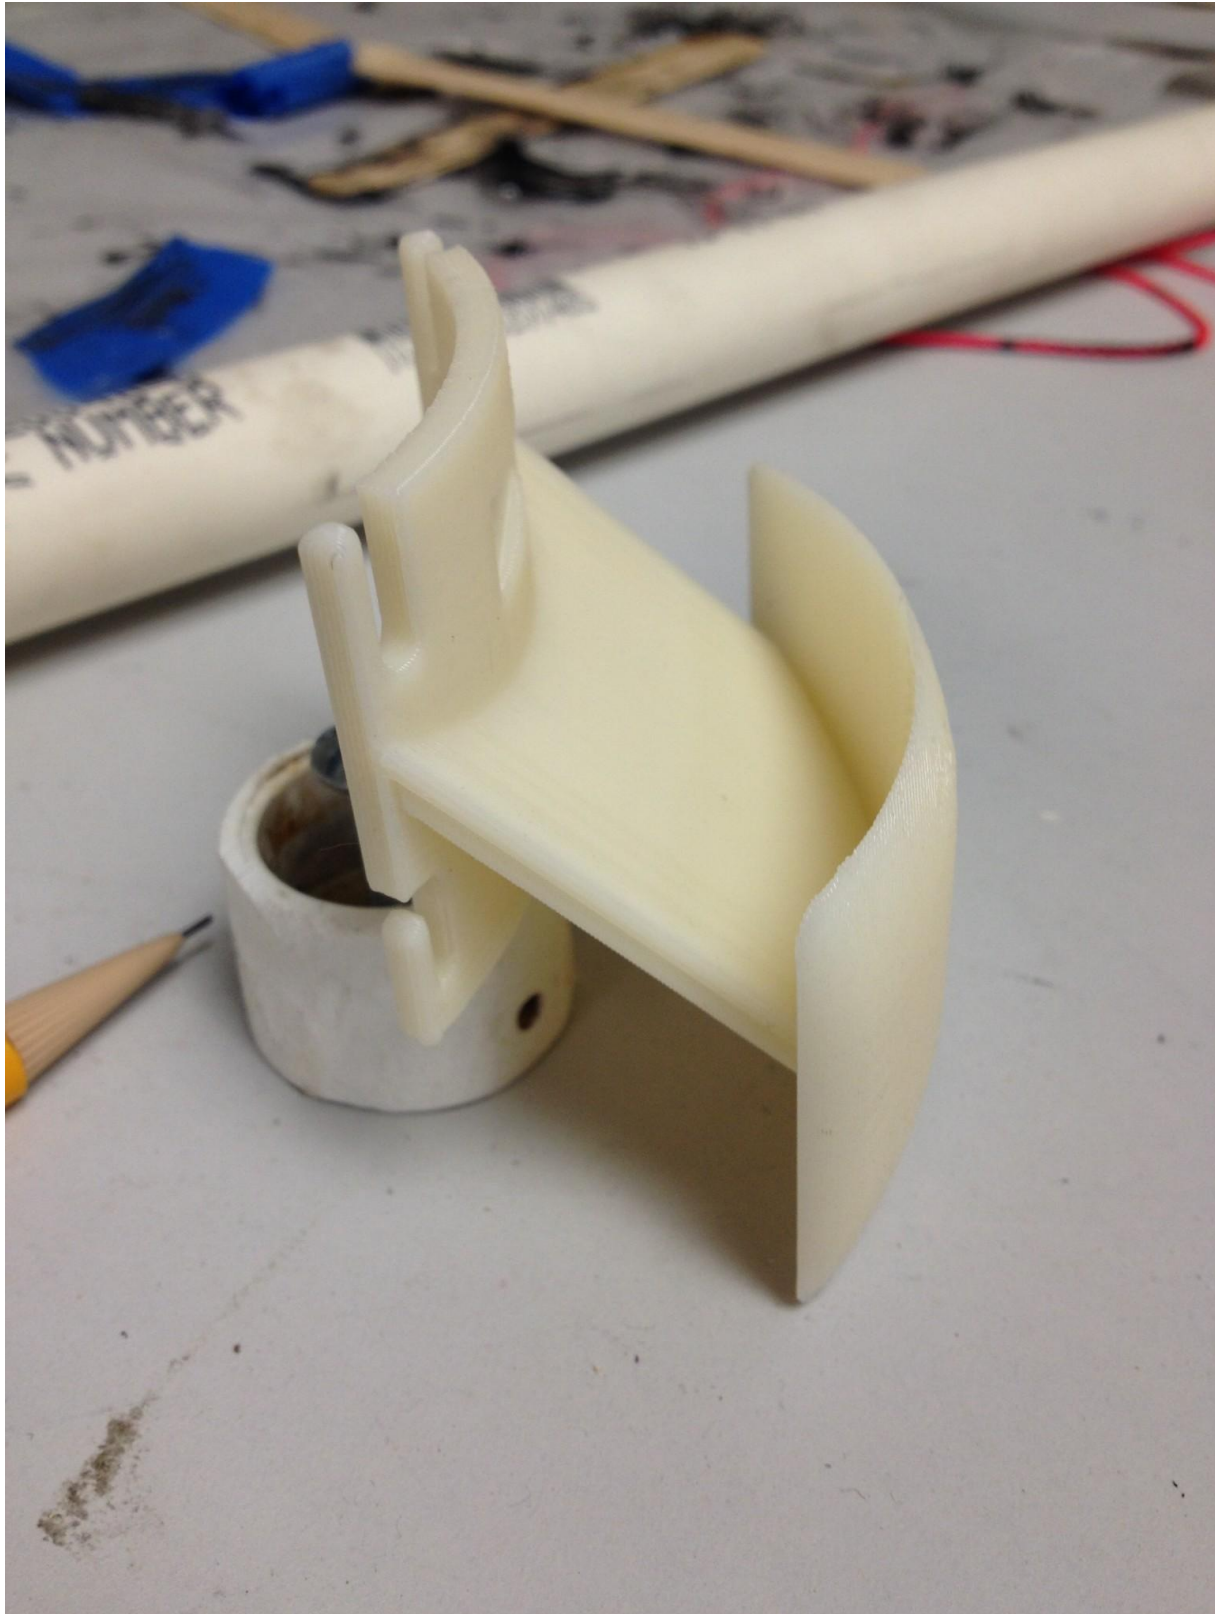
The two halves of the airbrake joined together. This shows what the final 3D printed part looked like and also illustrates how the two halves will fit together.
